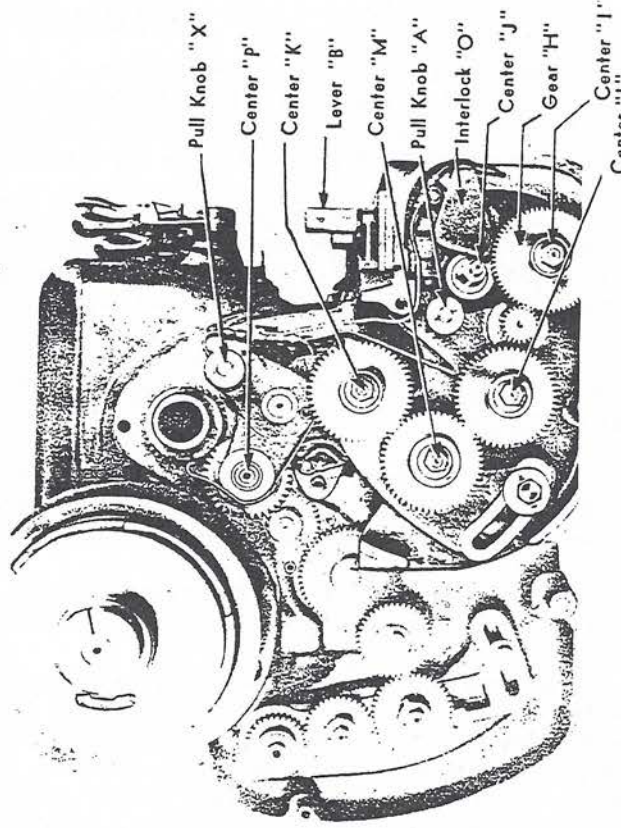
End Gearing for Lathe Equipped With Reverse To Leadscrew, Coarse Threading Attachment and (in phantom) Universal Relieving Attachment Gearing
